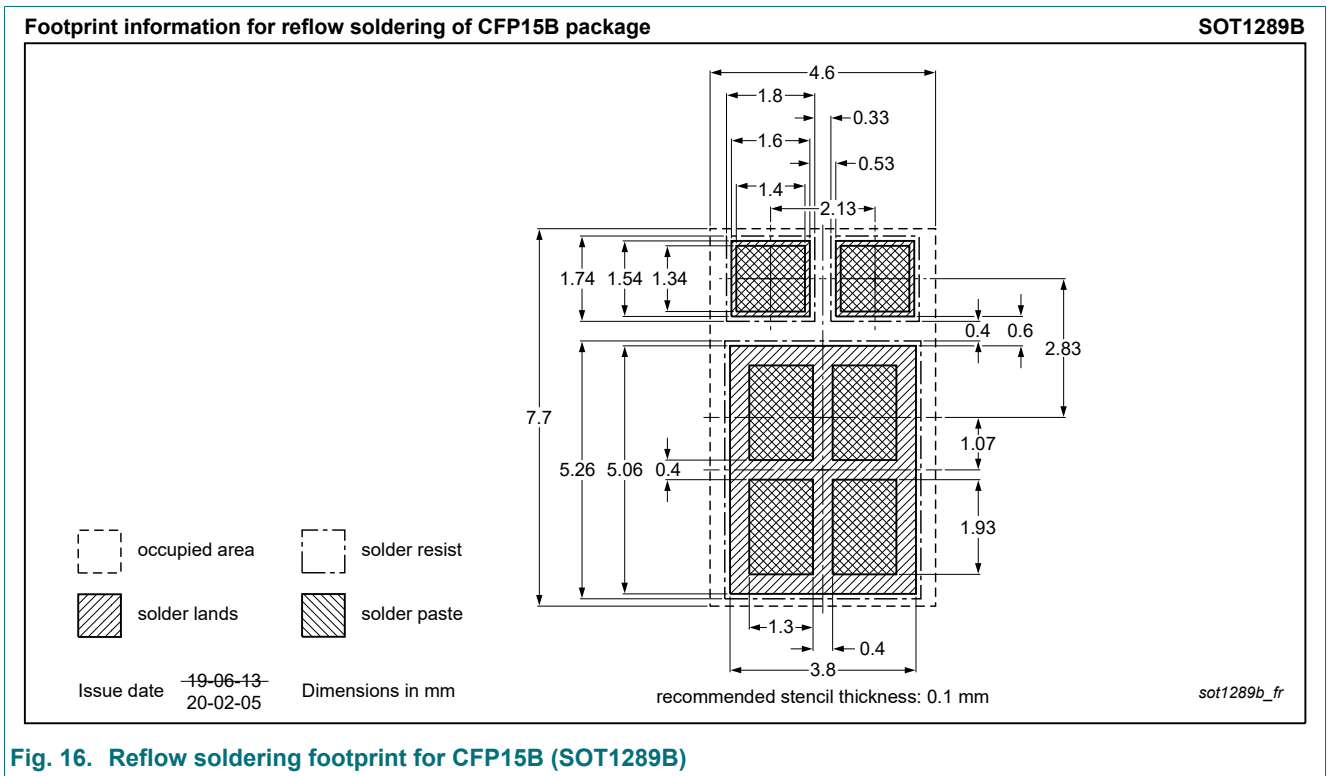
Reflow soldering footprint for CFP15B (SOT1289B)
